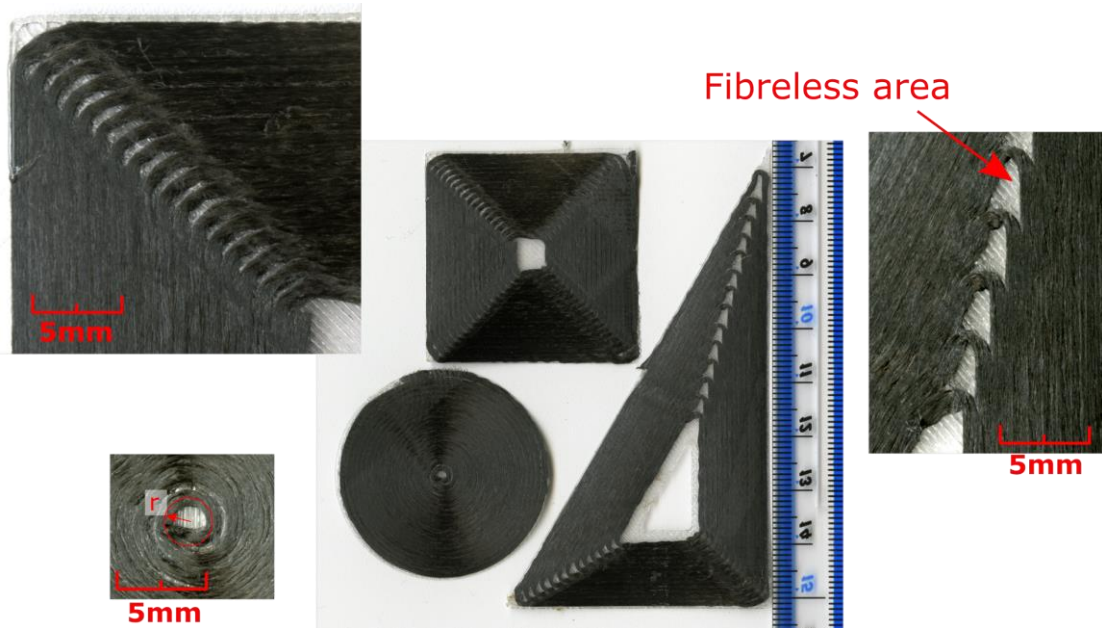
Benchmark prints for MarkOne printer with detail of corner radii.
